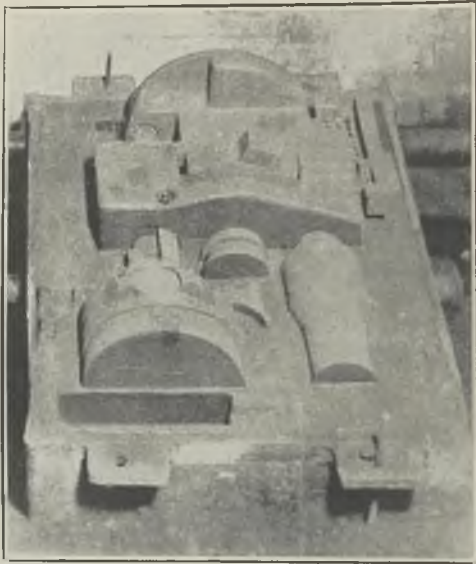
CORES ASSEMBLED IN GEAR-CASE MOULD.
